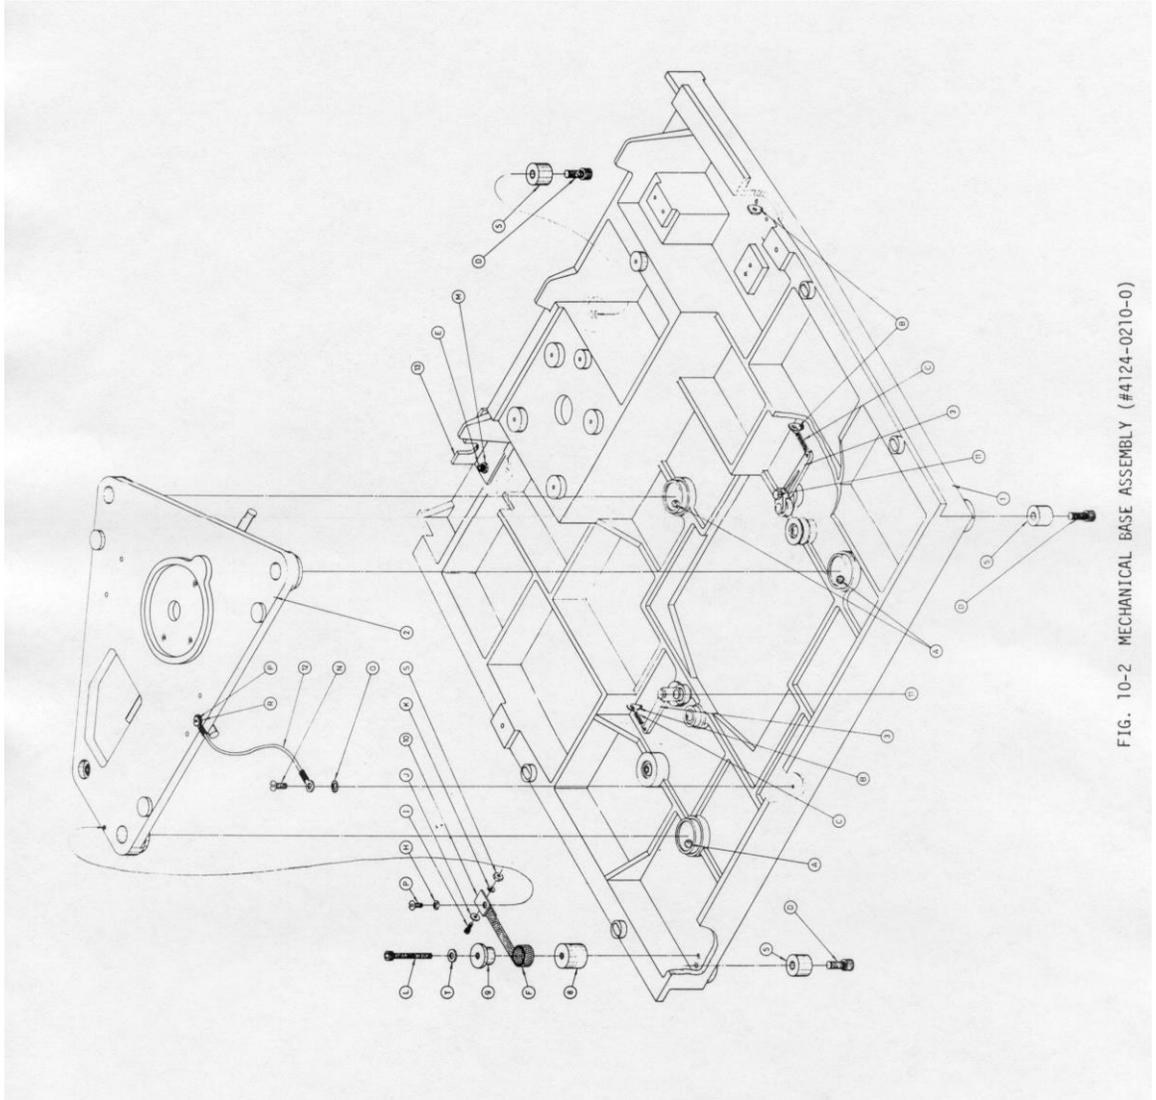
MECHANICAL BASE ASSEMBLY (#4124-0210-0)
